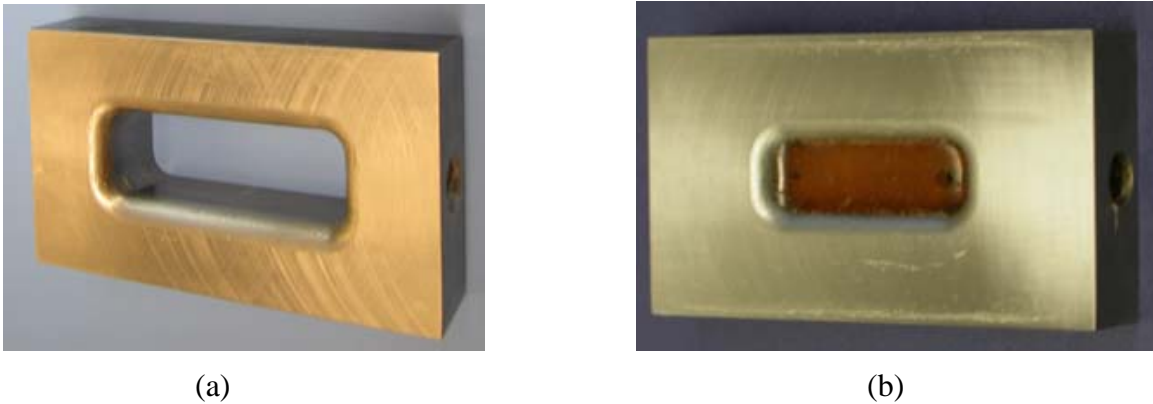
Die FF1, (a) free forming die and (b) urethane potting on the same die to get a fixed end.
